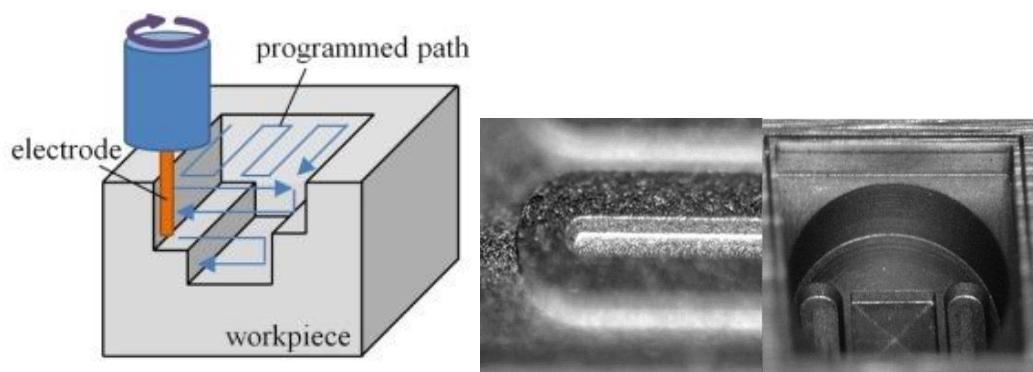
Schematic representation of EDM milling and an example of machined features.
